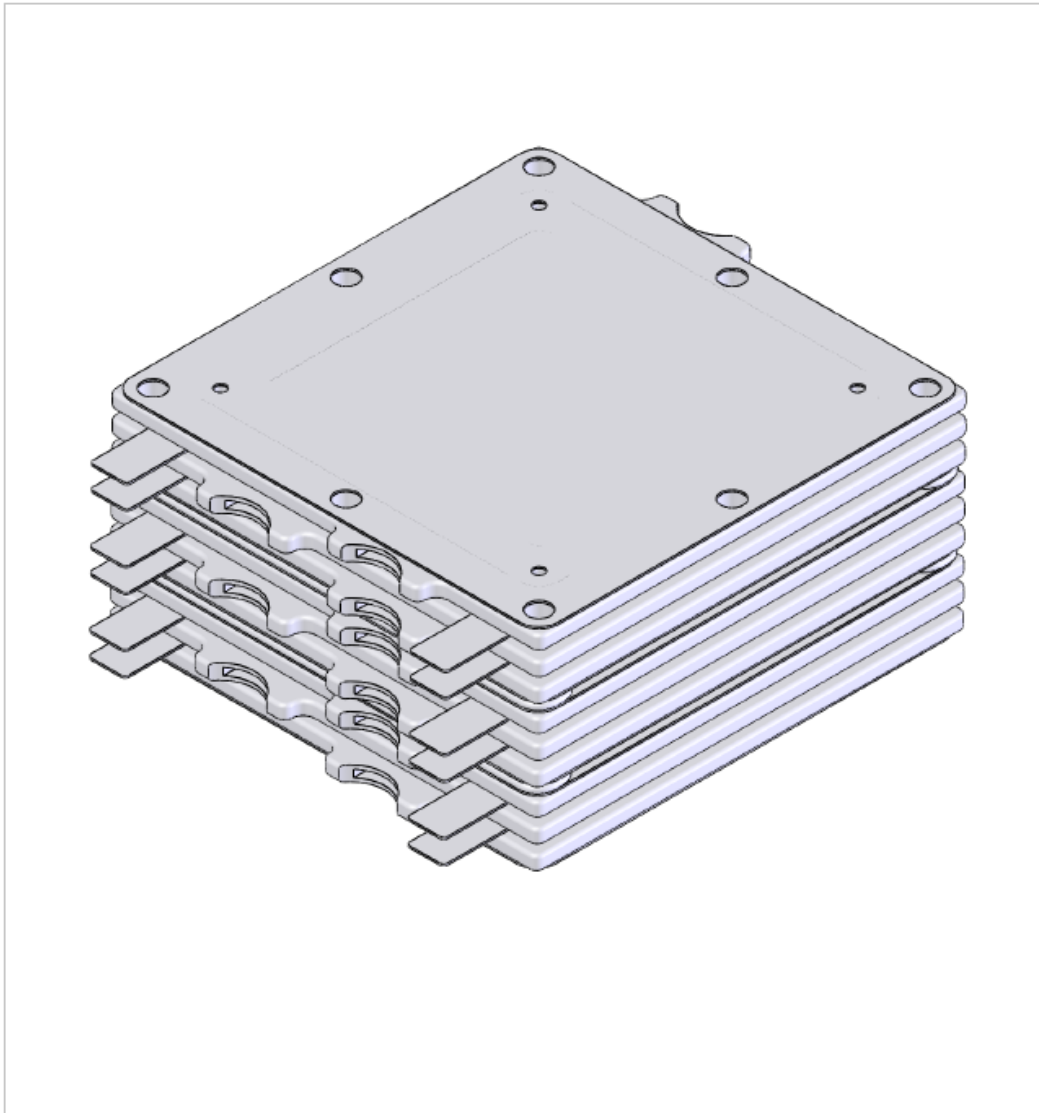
Complete fuel cell module, comprising 6 single cells, 9 troughs, 6 end plates and two cooling gaps, the electrical poles and gas ports can be seen in the drawing
